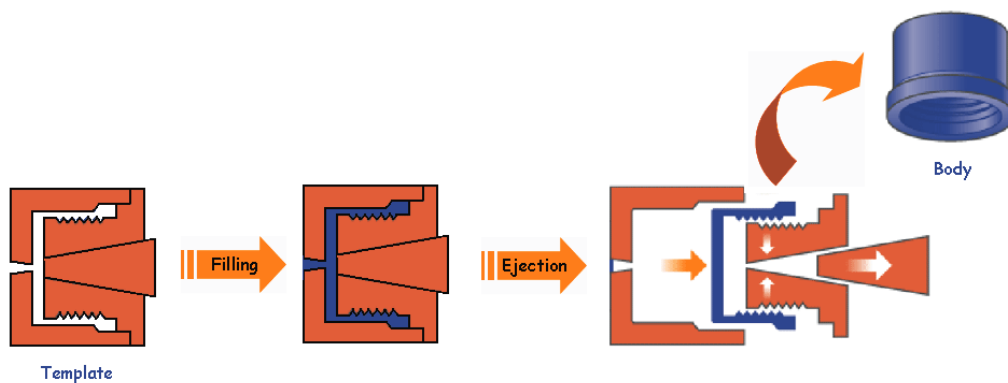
Schematic drawing of the traditional casting process.³³
